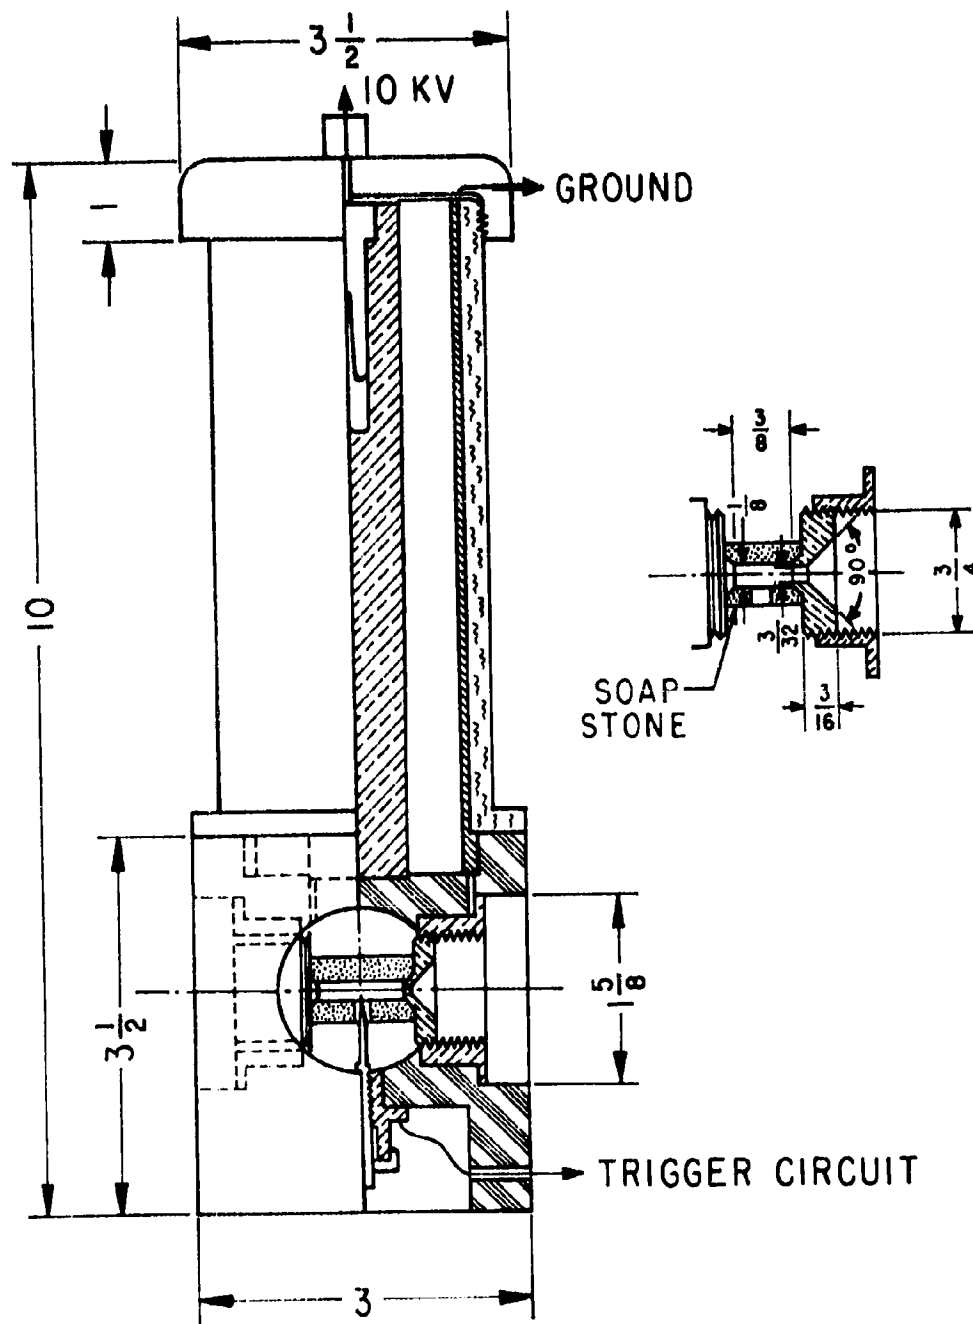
LIGHT SOURCE CONSTRUCTION DETAILS
